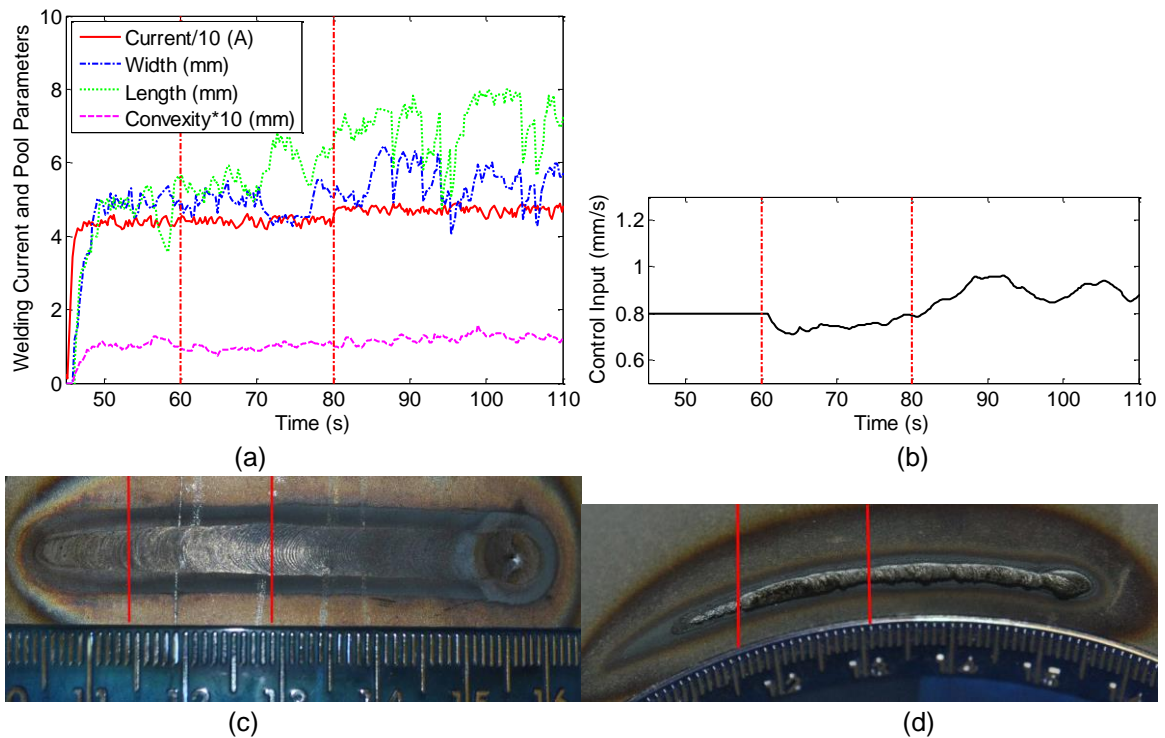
Experiment 2 results (a) Welding current and weld pool parameters (b) Control input (c) Front-side bead (d) Back-side bead.
